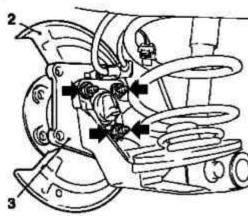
Mounting the module bearing wheels: 1 - the wiring harness connector, 2 - housing, 3 - mounting plate
